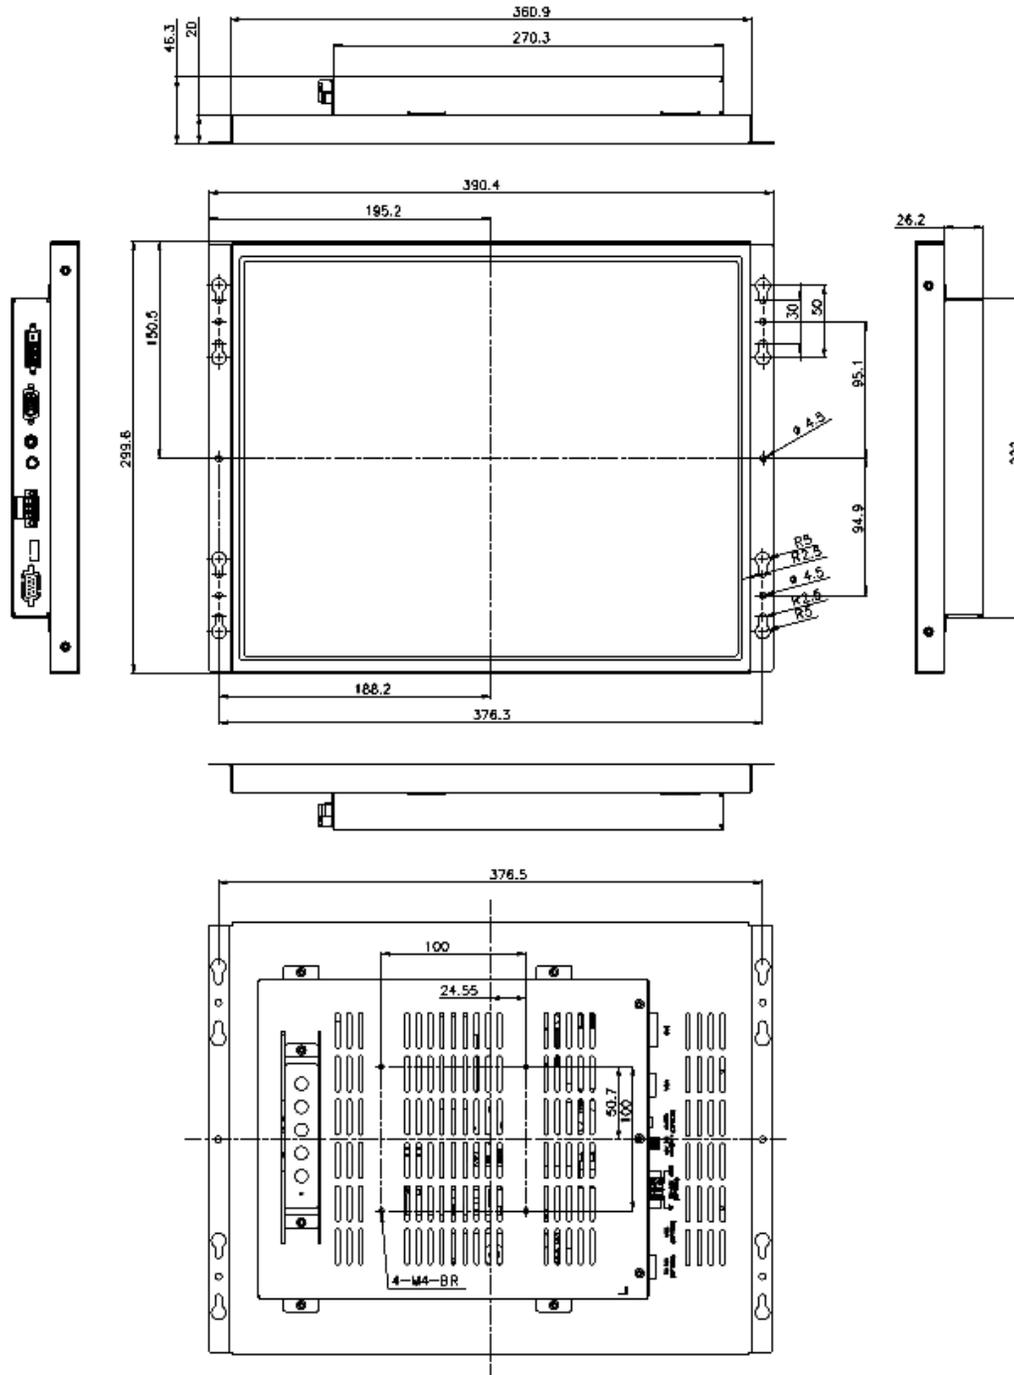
LCD-KIT170G Physical Dimensions (millimeters)
